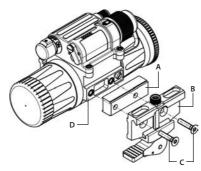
INSTALLING THE MOUNT WITH THE RAISER
